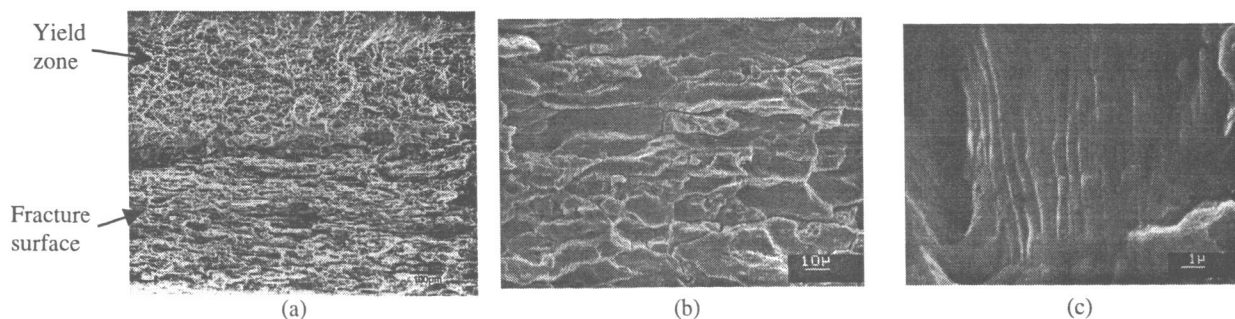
Scanning electron micrographs of fracture features from the B727-90C joint; a) Typical intergranular fracture, b) Close-up of intergranular fracture with secondary cracking common to all fracture surfaces, c) Typical fatigue striations that were found in cracks 2 and 3 (refer to Figure 7a).
